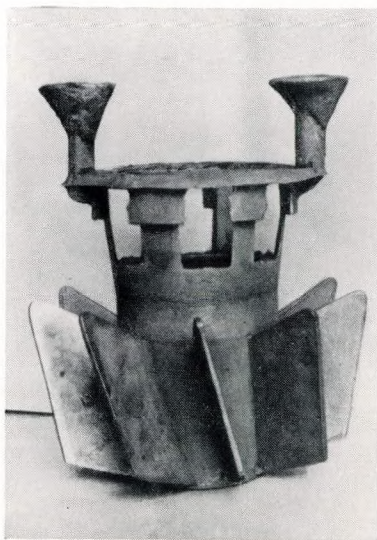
S.G. iron nozzle with cooling ribs, for oil burner
